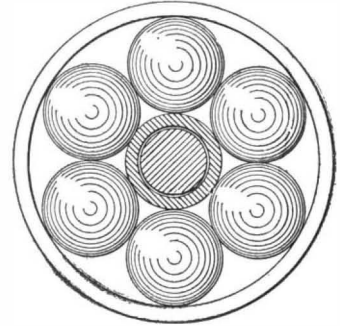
FRONT VIEW OF 6-BALL BEARING.
